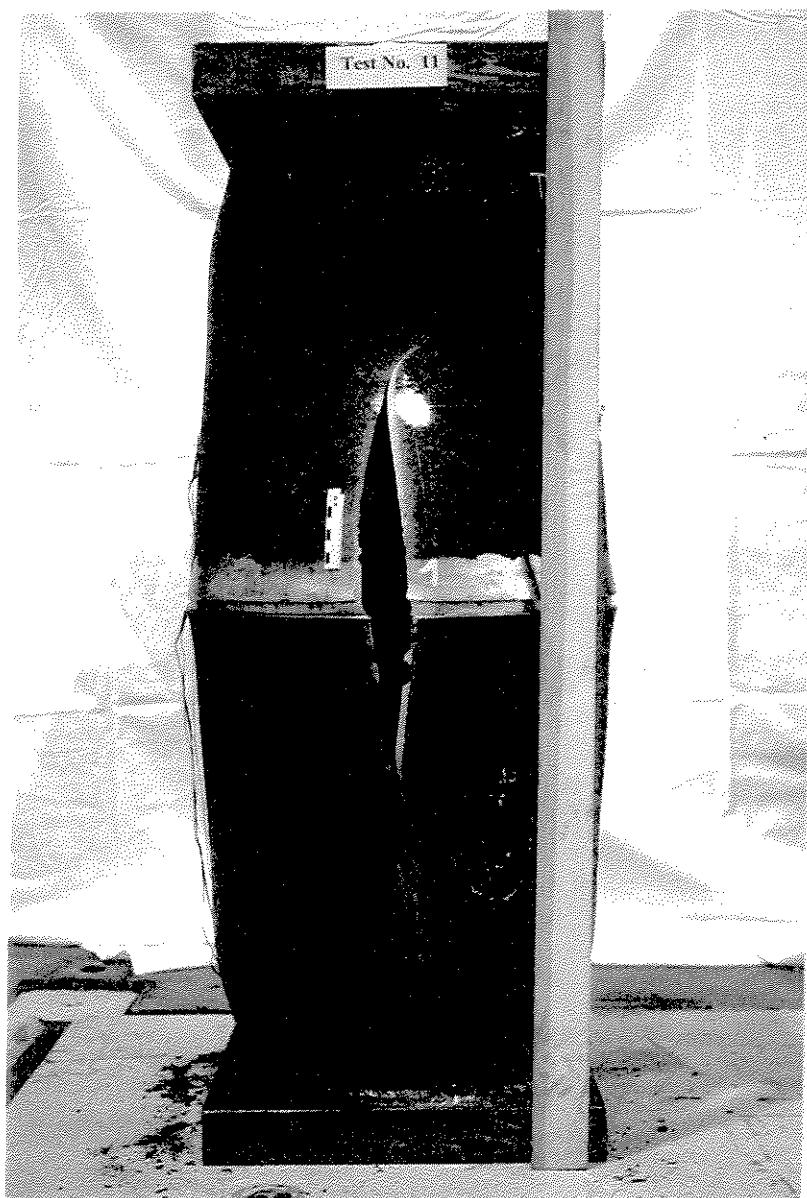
Picture of the test specimen no. 11 after the burst test
